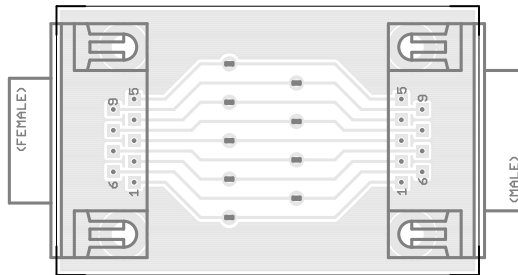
Board top view (with bottom copper tracks) showing placeplan with component values
